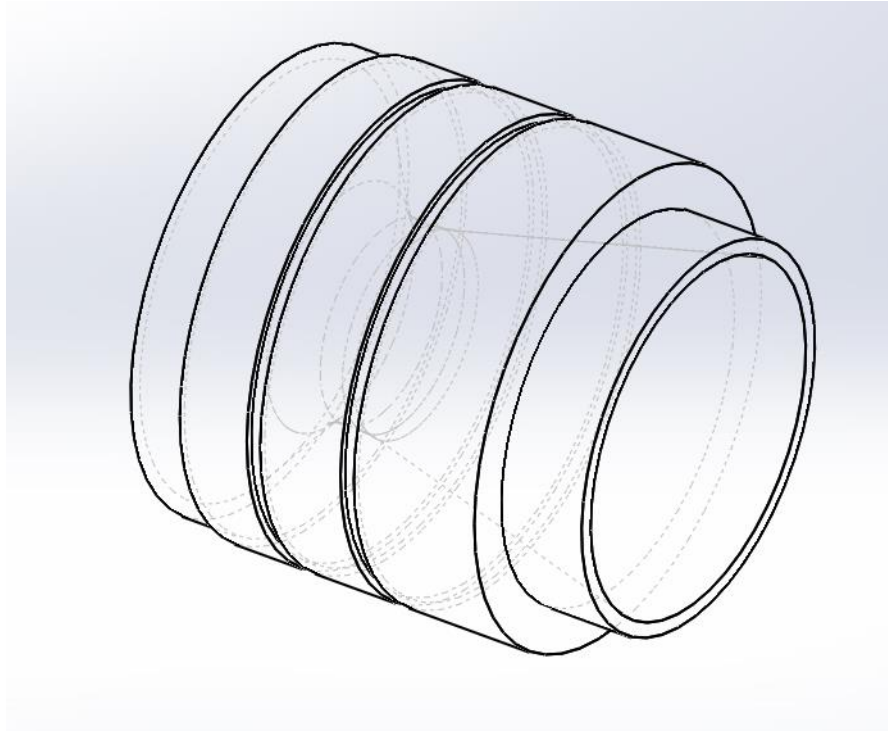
3D Model of Nozzle Designed in Solidworks
